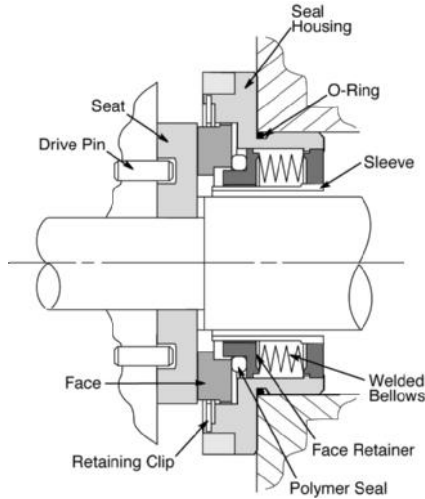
A non-contacting gas-lubricated seal for cryogenic service (John Crane Inc.)
